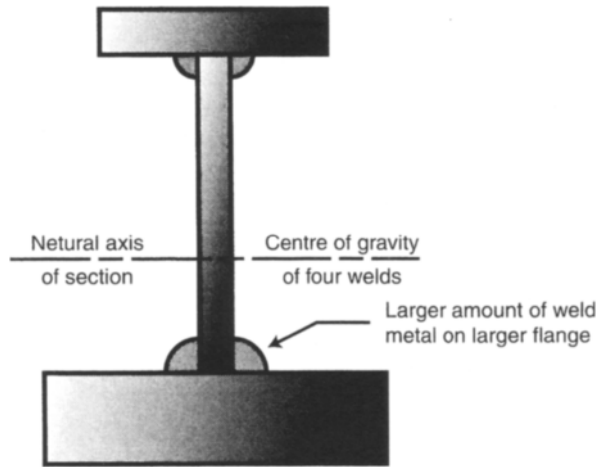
Welding of an unsymmetrical fabricated beam.
